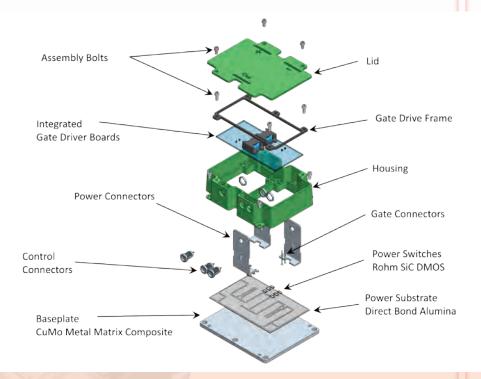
Exploded view of the high-temperature SiC half-bridge power module.
